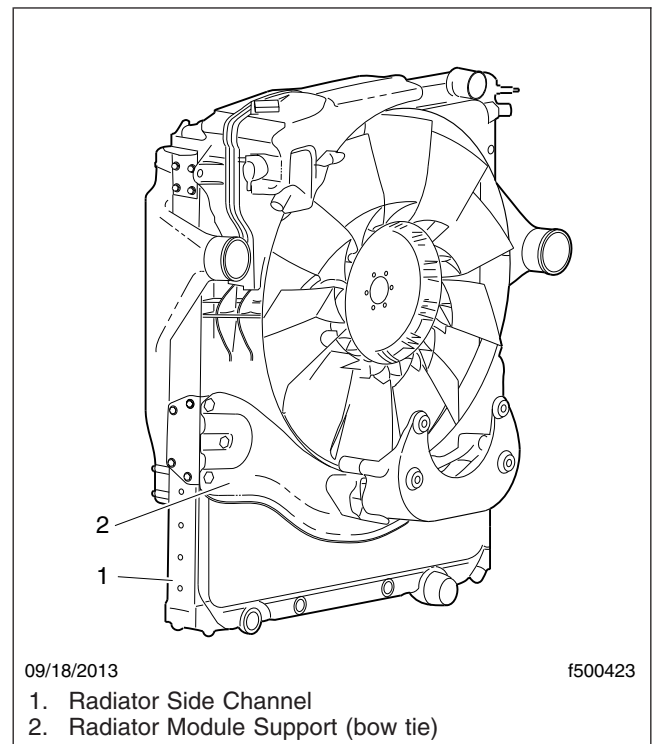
, "Bow-Tie" Mounted 1625 sq in Radiators
